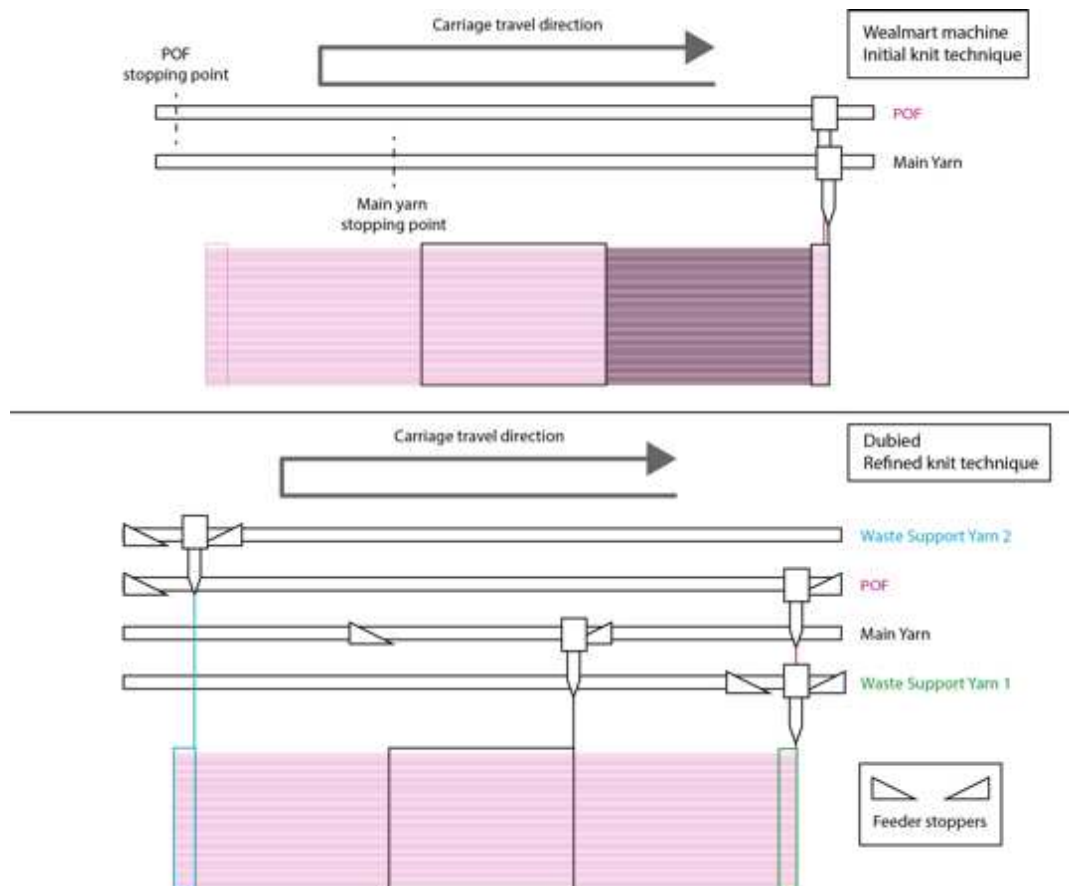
Wealmart Knitting machine setup (Top), Dubied Knitting machine setup diagram (Bottom)
